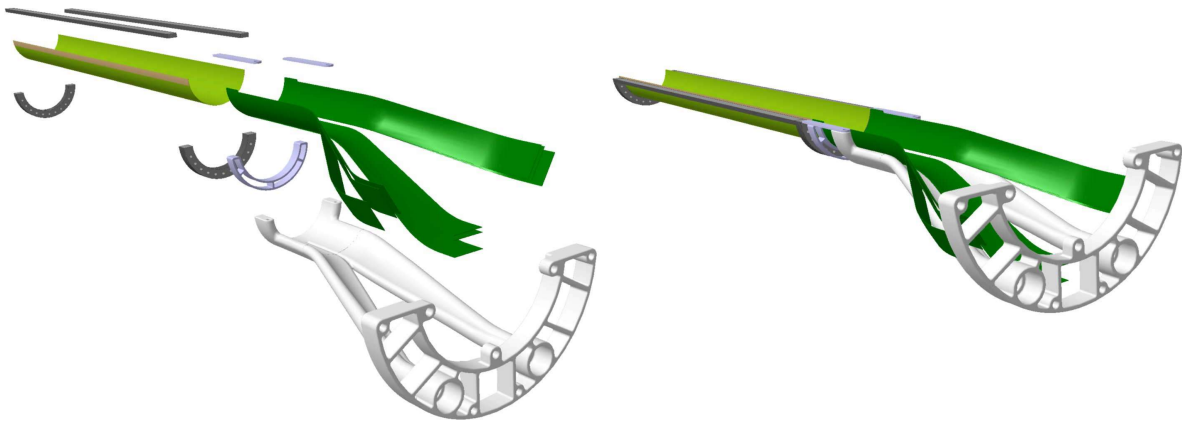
Schematic view of the half-layer 0. (a) Exploded view and (b) assembled view.
